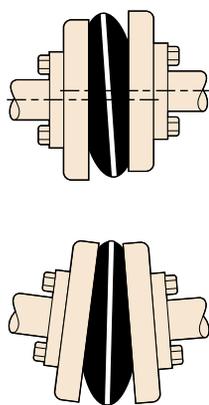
Shaft couplings adjust for and accommodate angular and parallel misalignment between rotating shafts.
